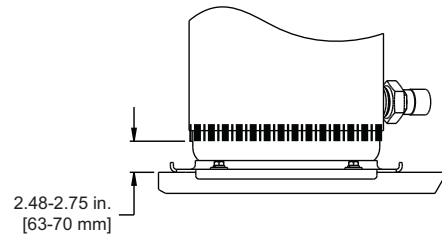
Copeland ZP236, 296 Crankcase Heater Location
